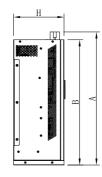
Dimensions of wall mounted type Tab. 2-2 Model dimensions
